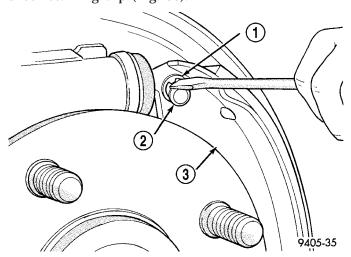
Parking Brake Lever Pin To Brake Shoe Retaining Clip
